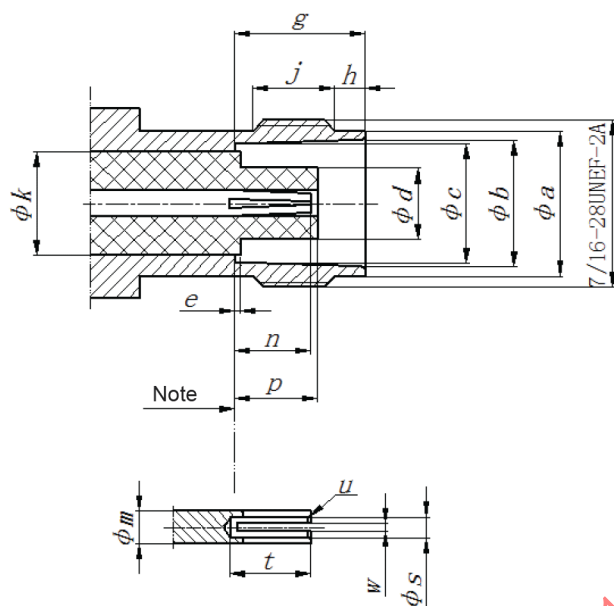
Connector with pin centre contact (for dimensions, see Table 1)
